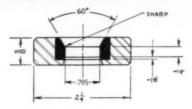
DRAW & PINCH TRIM DIE CONVERTED A-25
